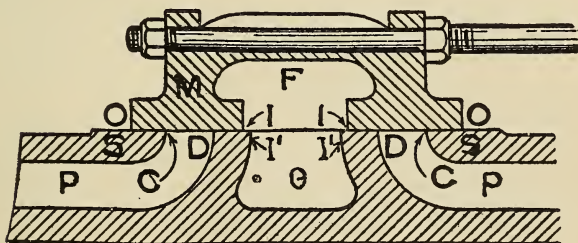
A plain unbalanced slide valve. The parts are: M, valve; S, seat; O, steam edges; I, exhaust edges; CD, steam ports; P, steam passages; I'I', exhaust port; DI', bridge; F, cavity; G, exhaust cavity; OC, *outside lap*; DI, *inside lap*.
